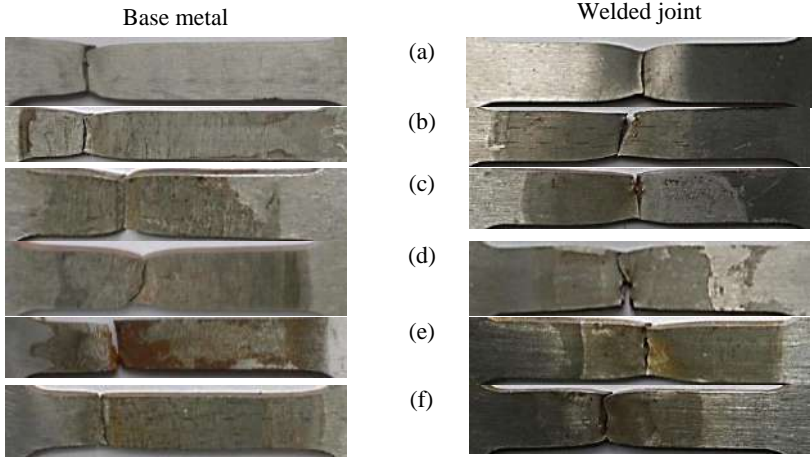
Appearance of base metal specimens of 17G1S-U steel and welded joints after tests under different conditions: in air (a); in NS4 solution at the corrosion potential (b); at cathode potentials -0.75 V (c), -0.95 V (d), -1.05 V (e), $E = -1.20$ V (f).
